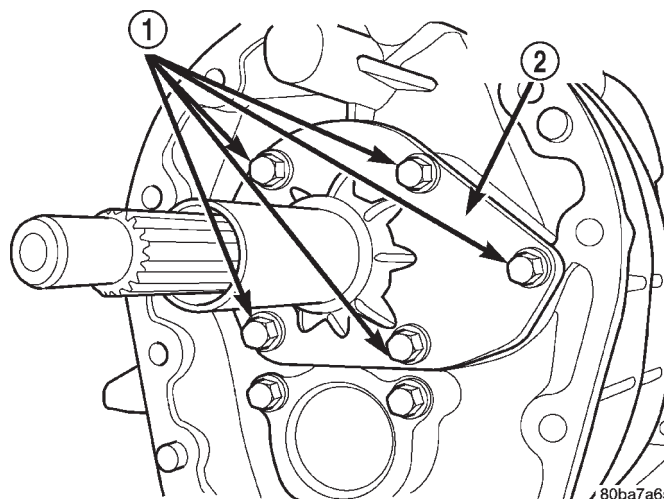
Installing Input Shaft Bearing Retainer Bolts
